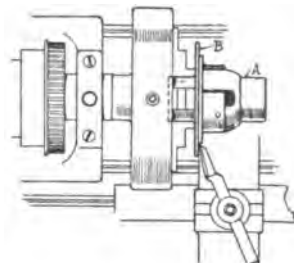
Breakage of the ring gear usually springs the differential housing flange. By catching the entire housing in the lathe and truing it up by the surface (A), the ring gear seat (B) may be refaced with a light cut.
